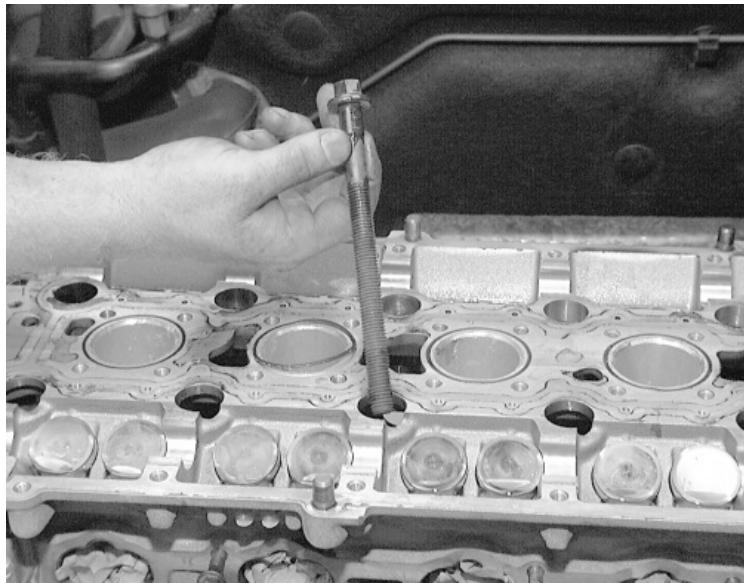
Remove the bolts from the cylinder head; if necessary, use a magnet to extract them
